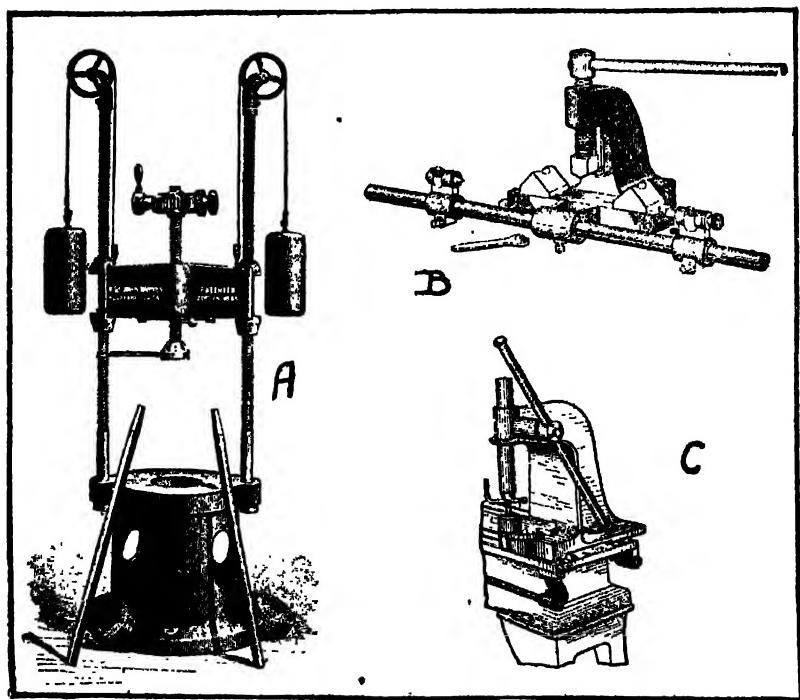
Showing Construction of Arbor Presses and Shaft Straightening Machines.
